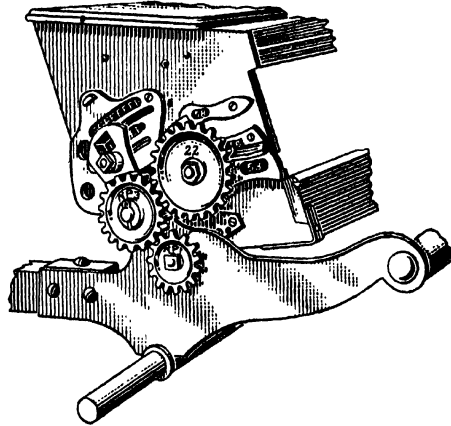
“NONPAREIL” GEARING AND DROP BEARING. [Smyth.]
